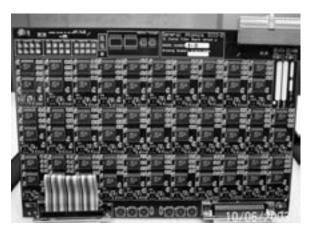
Front side of 32 channel filter PCB in 6U PCI format.
